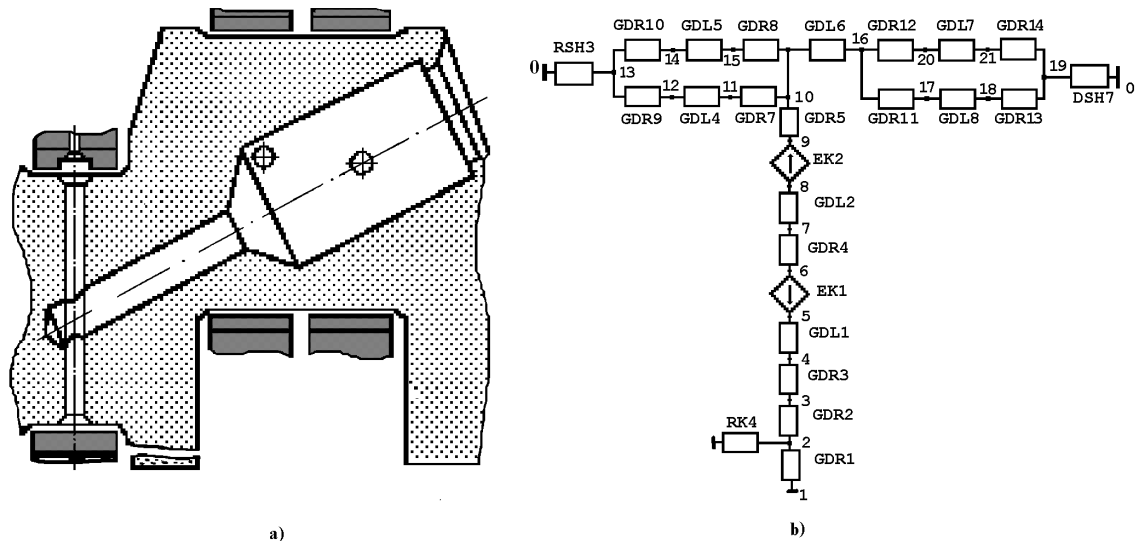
The crankshaft bearing lubrication system element: a) scheme of lubrication system for the 4-th main and 3-rd, 7-th connecting rod bearings; b) substitution scheme.
